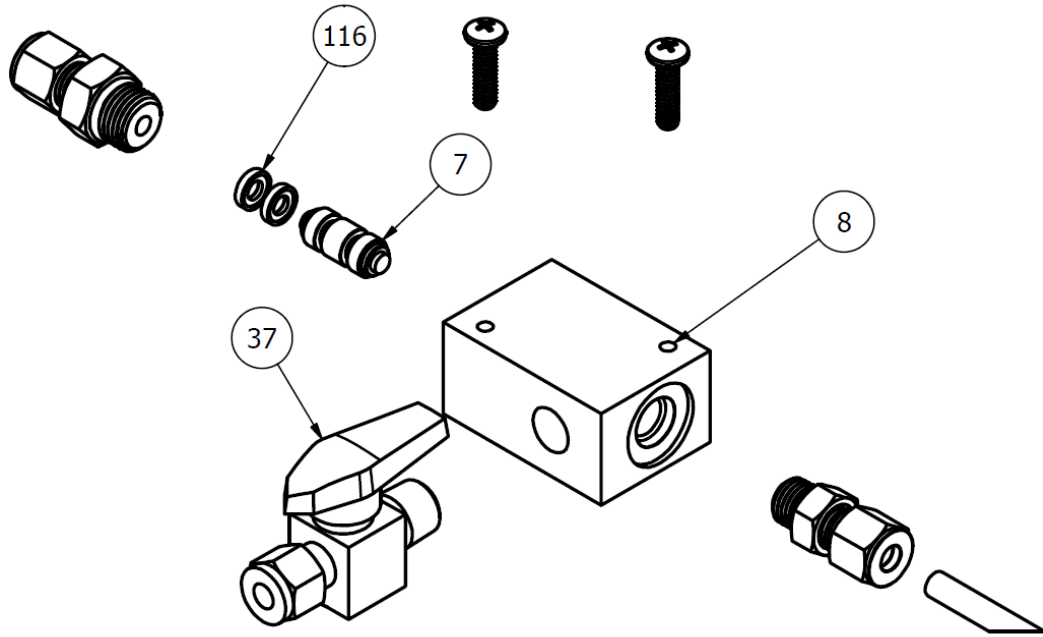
Release Valve (RV-1) & Bypass Valve (BV-1) Assembly
